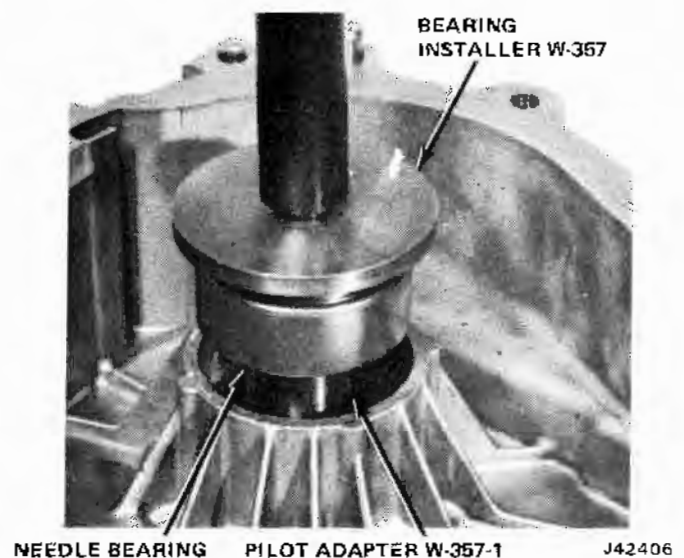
Installing Drive Sprocket Front Needle Bearing
